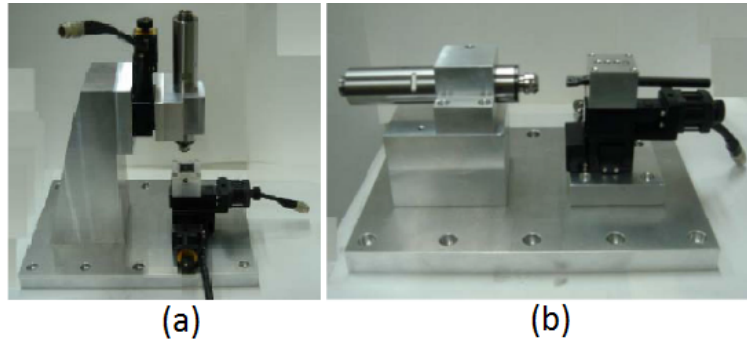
Reconfigurable micro milling - micro turning machine prototype [27]
